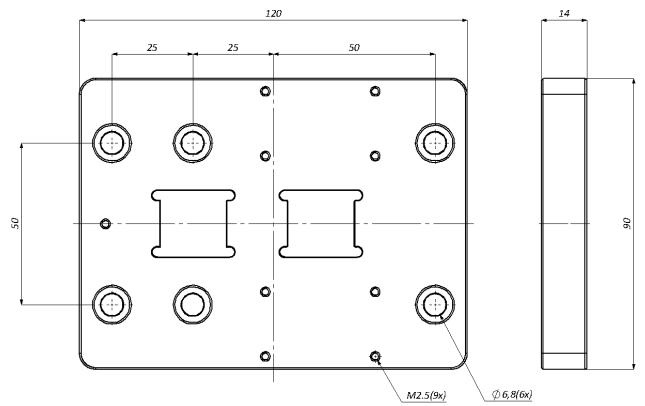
PHIX Cooling Carrier XL mounting base dimensions
